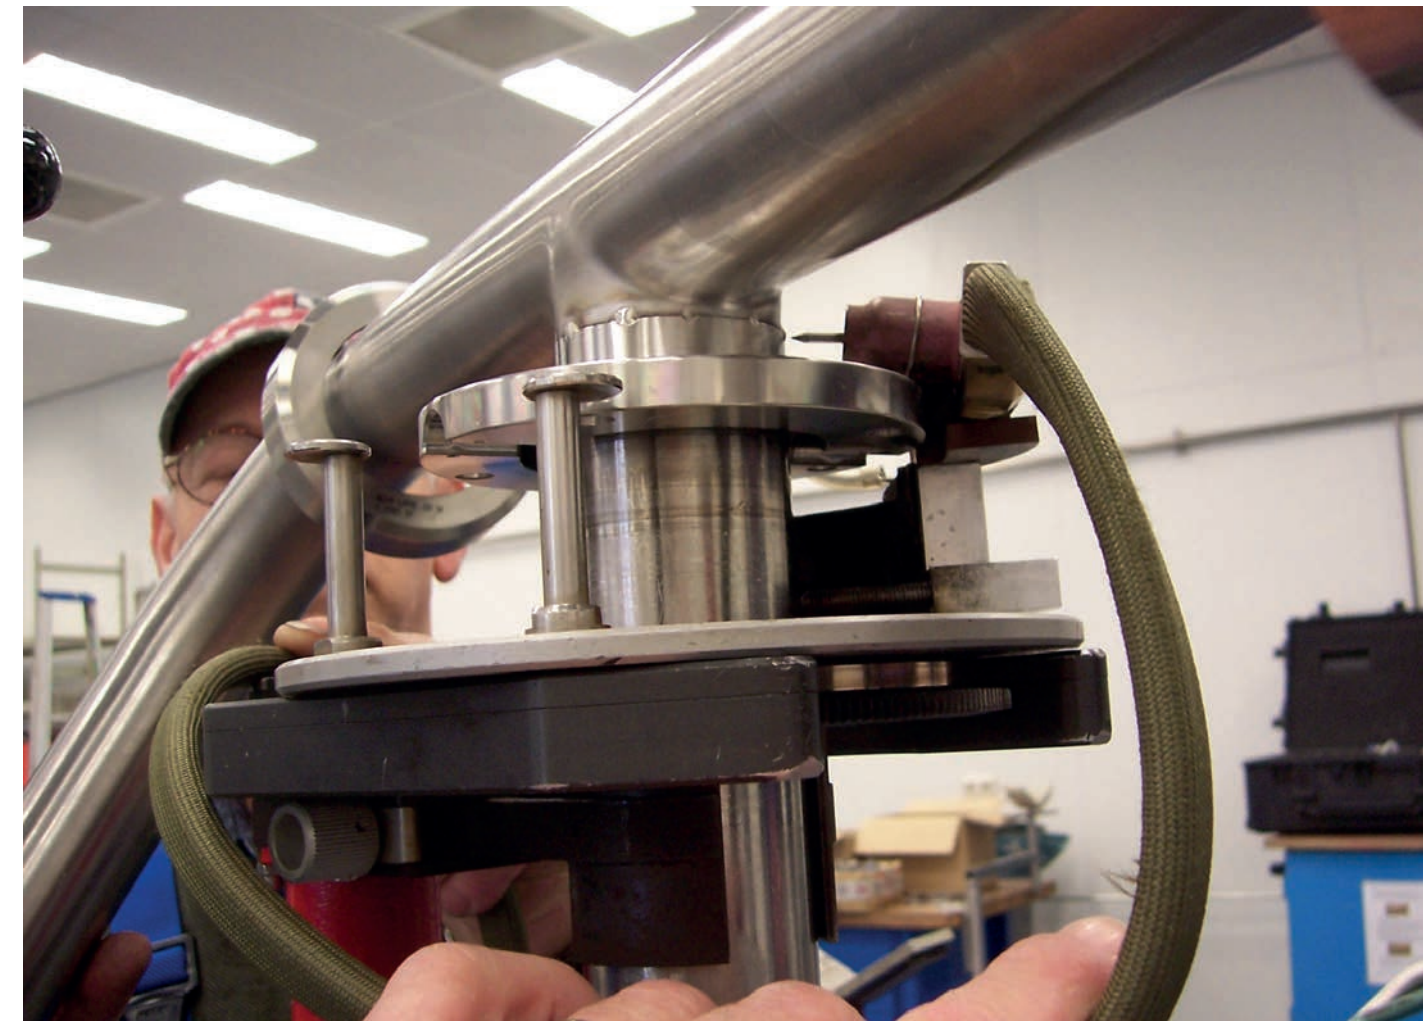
Orbital TIG welding with a closed chamber welding head
